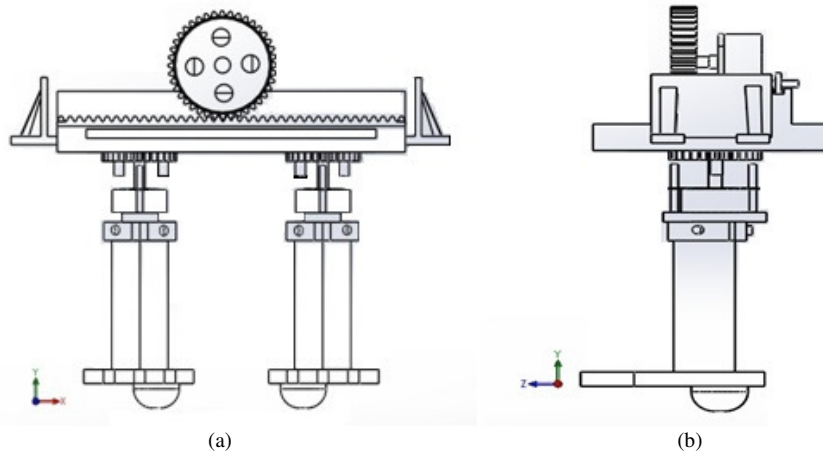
(a). Front view of assembled structure. 5(b). Right Hand Side View of the final assemble showing the curved surface in the foot.
